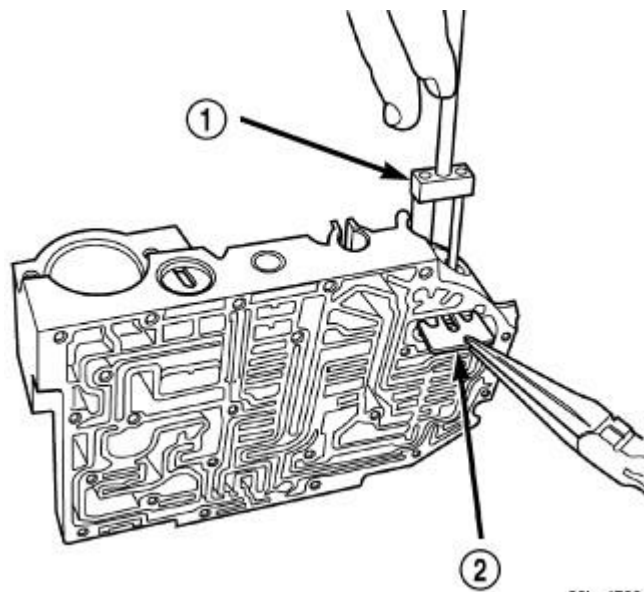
Remove/Install Regulator Valve Spring Retainer Using Tool 6302
